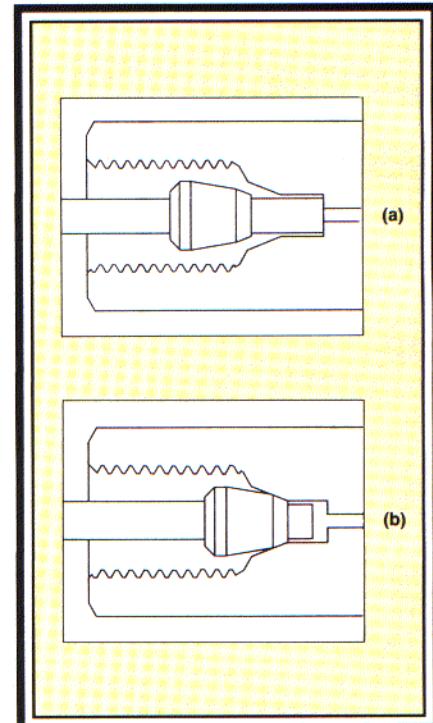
Tube ends that are not properly matched with the fitting body. (a) Long tube end with shallower fitting body will result in leakage. (b) Short tube end with deeper fitting body will seal properly, but will add to system dead volume.
